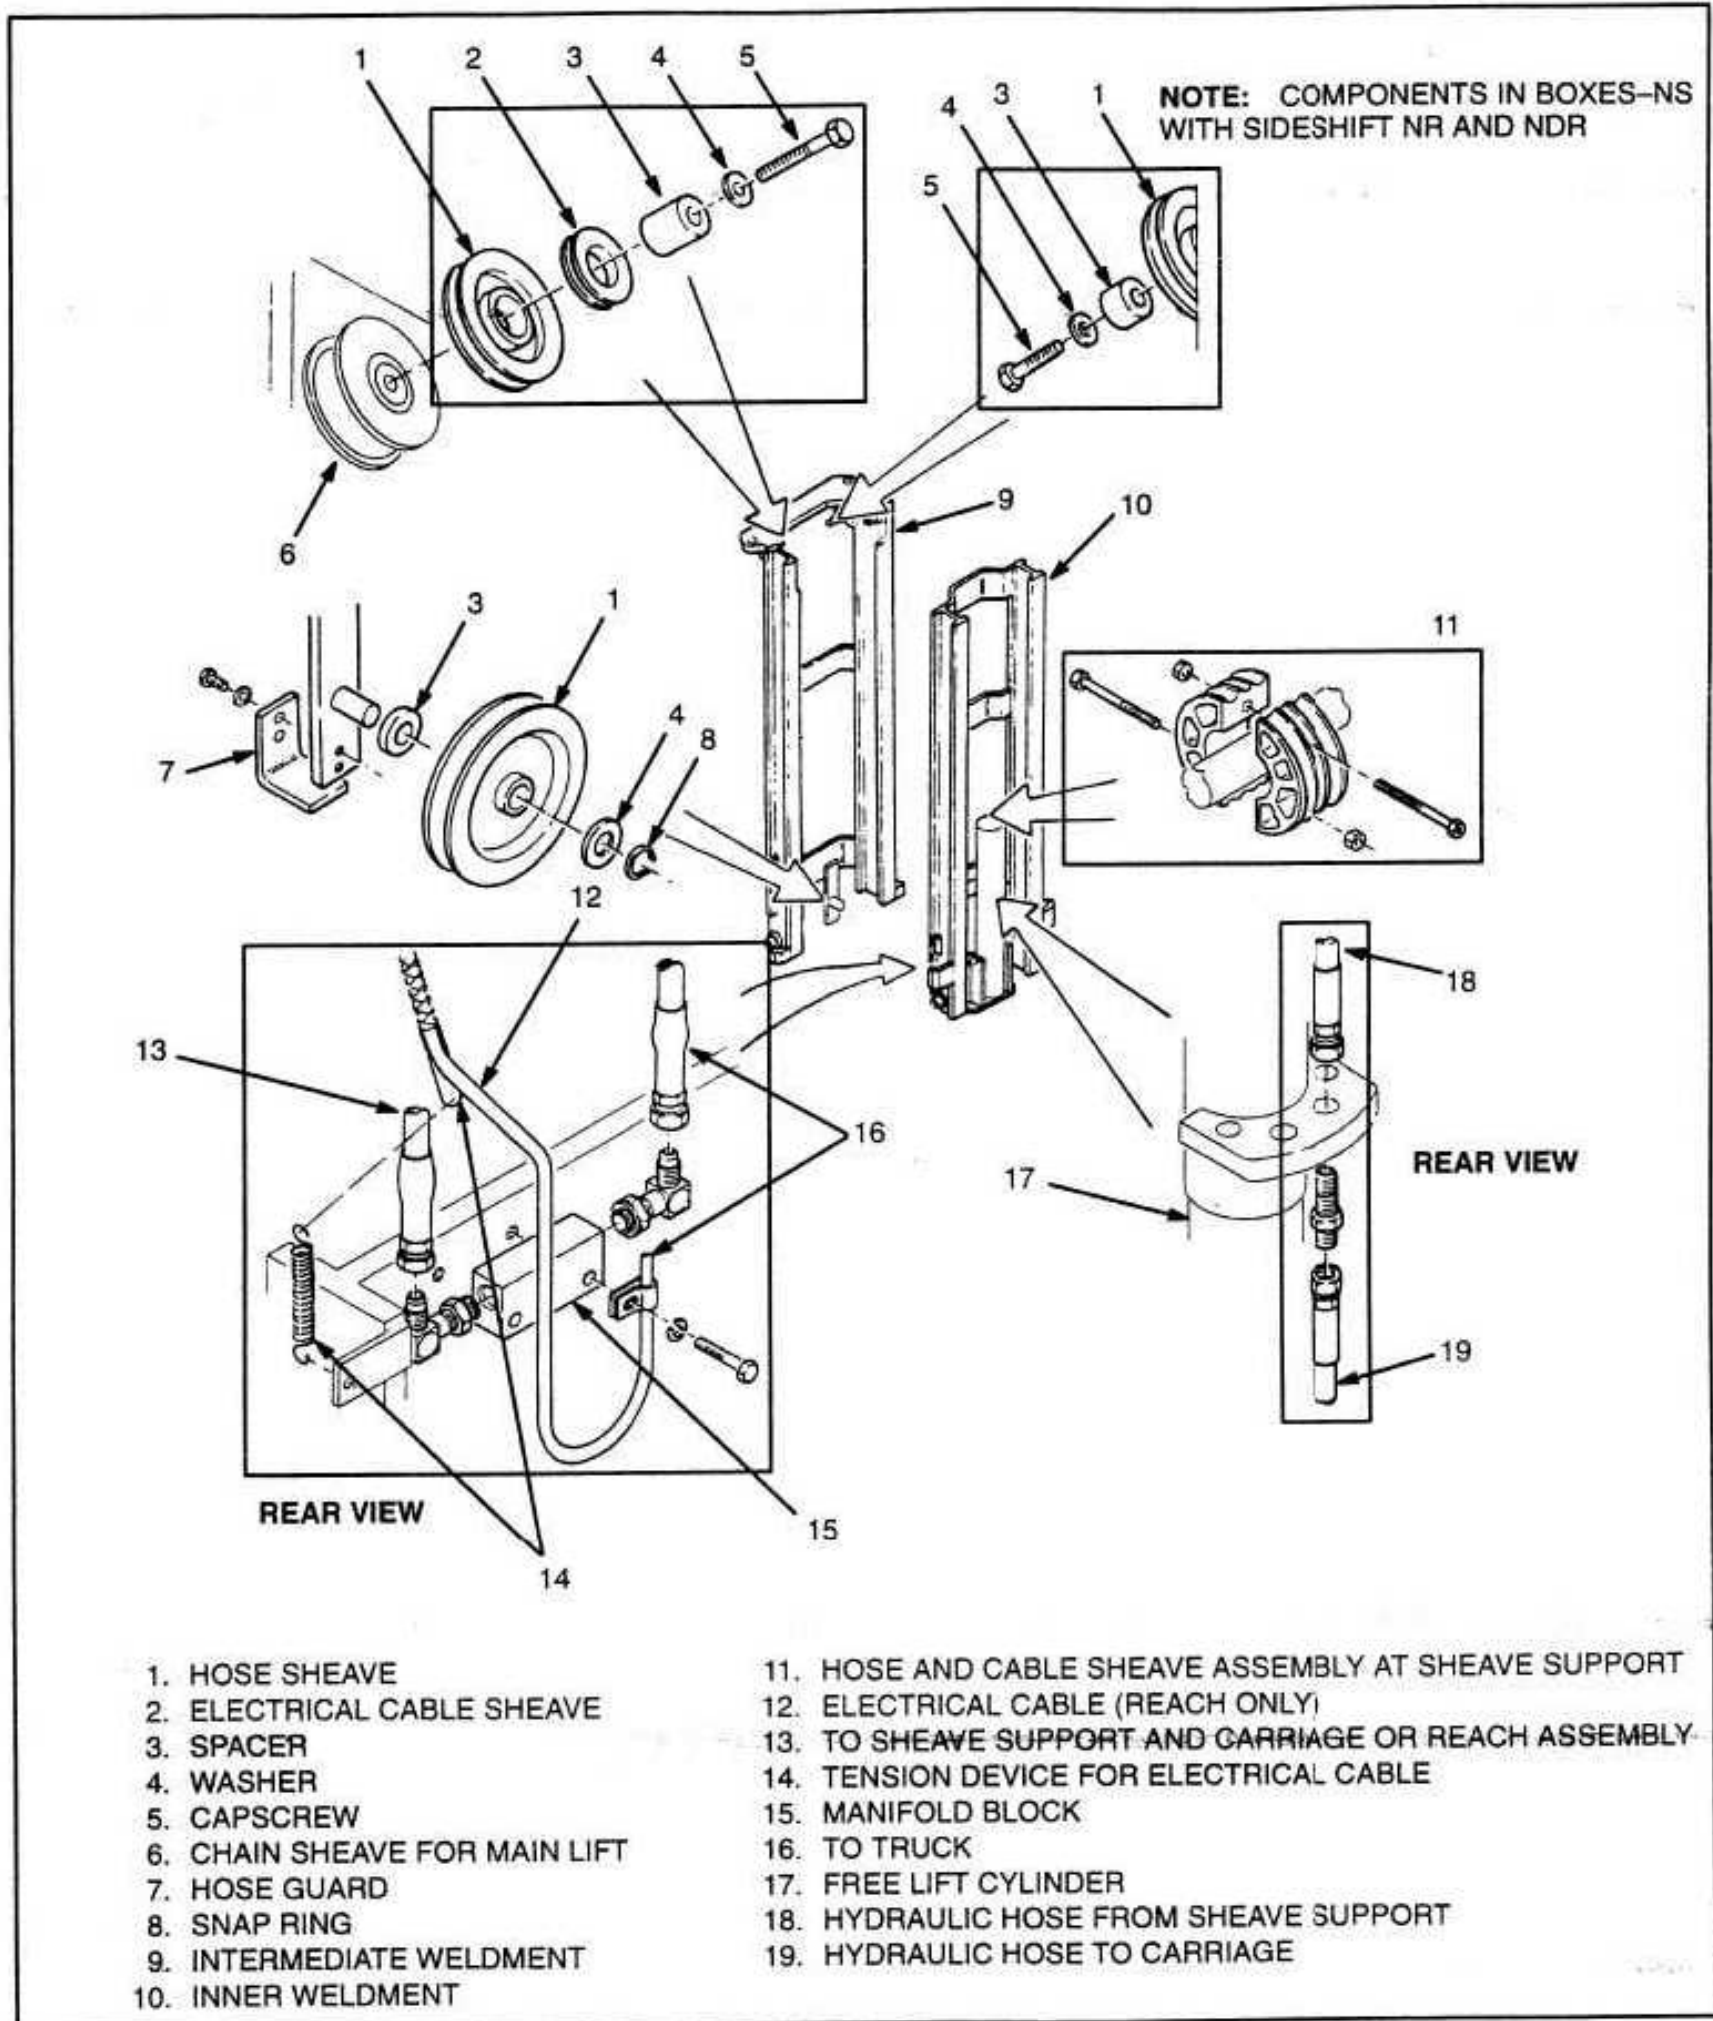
Hose and Cable Assemblies—Inner and Intermediate Weldments
